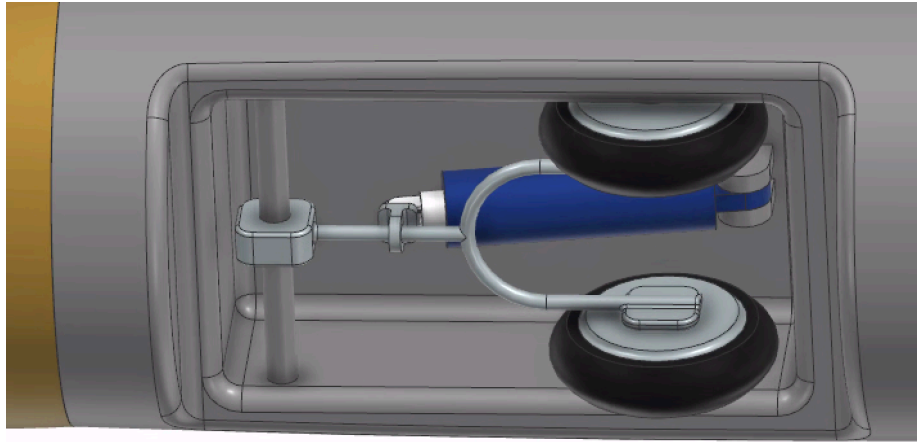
Hydraulic actuator outer cylinder with pin connection.
